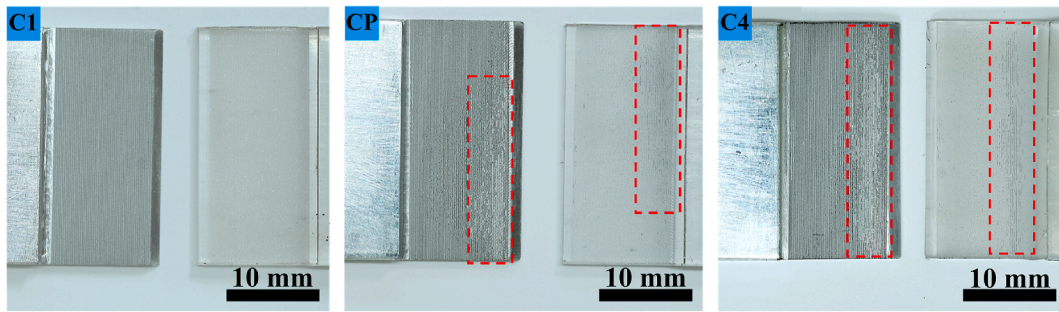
Fracture surface photographs of PC/AA6061 joints produced under injection overmolding conditions C1, CP and C4 (see Table 1). Red squares indicate a fracture of the strips formed on the metal surface.
